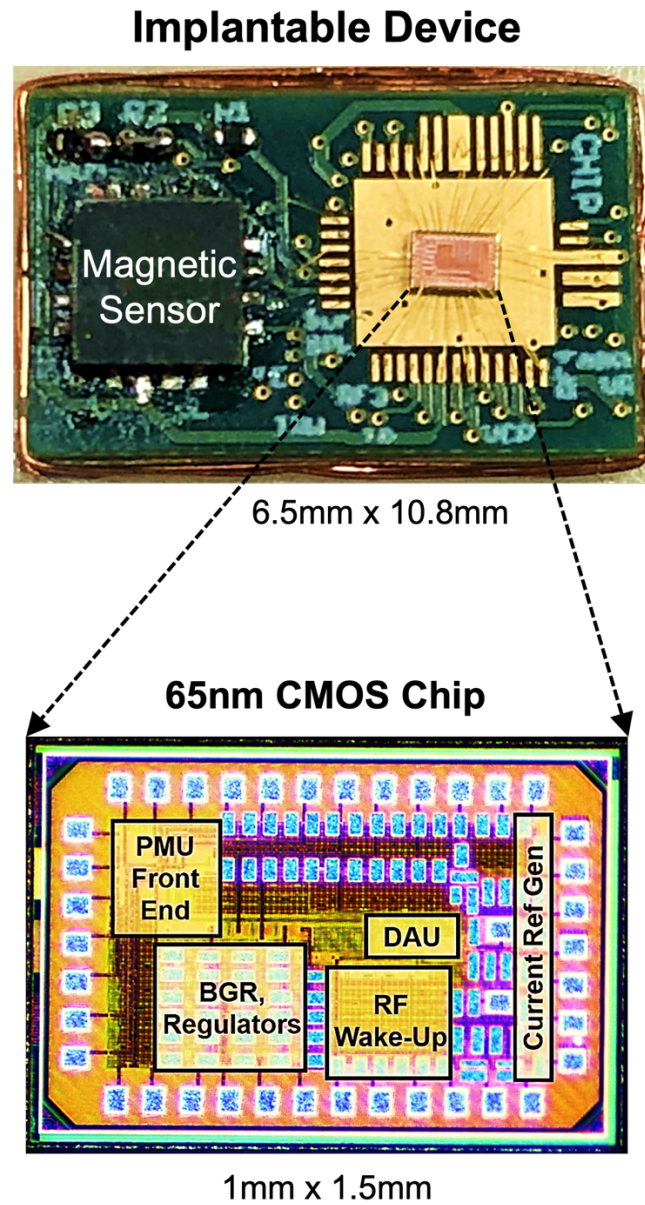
The assembled implantable device and the fabricated 65nm CMOS chip.
